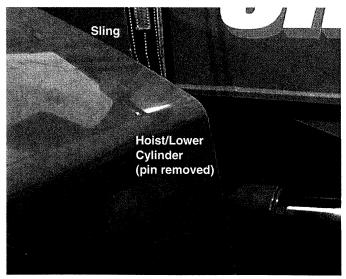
Raise <u>and support</u> the outer boom, then remove the hoist/lower cylinder pin and lower the cylinder onto a suitable support within the chassis cavity.
